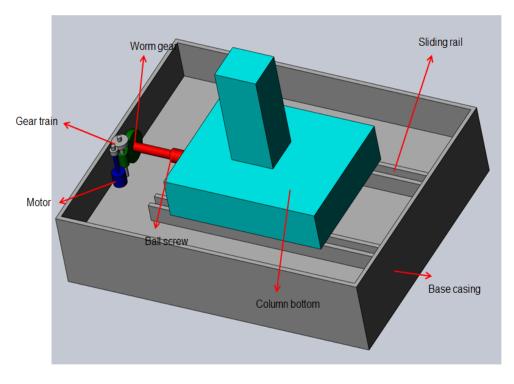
Table transverse movement mechanism design (Not to scale) According to each movement requirement identified in Figure 4.26, MMET was used to explore possible solutions. Table 4.6 shows a partial list of components that fulfil the movement requirements provided by MMET.
